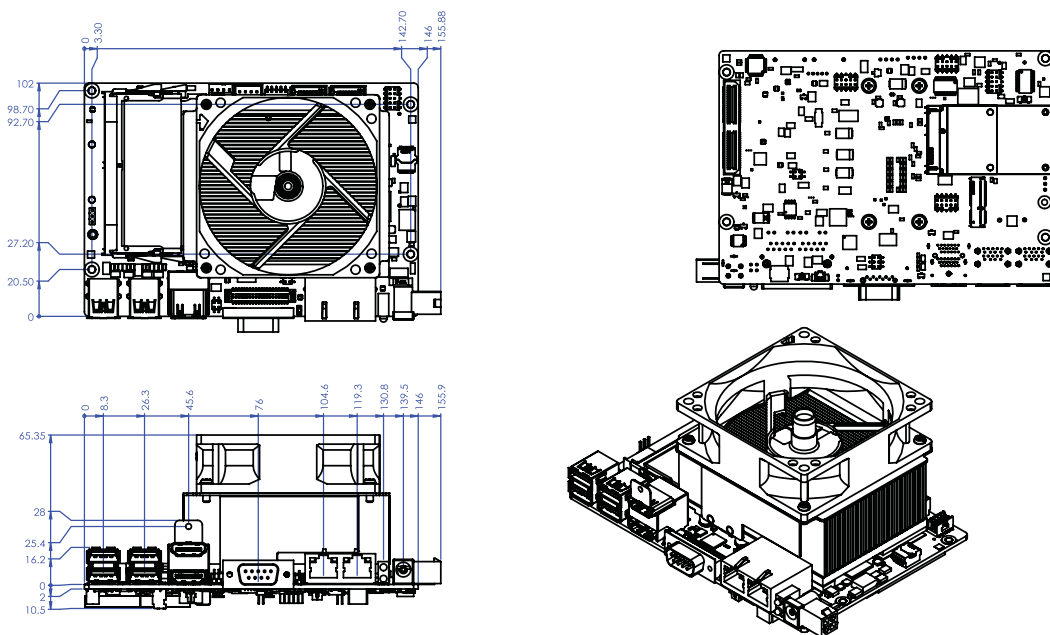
MIO-5391 Mechanical Drawing (with Cooler)
